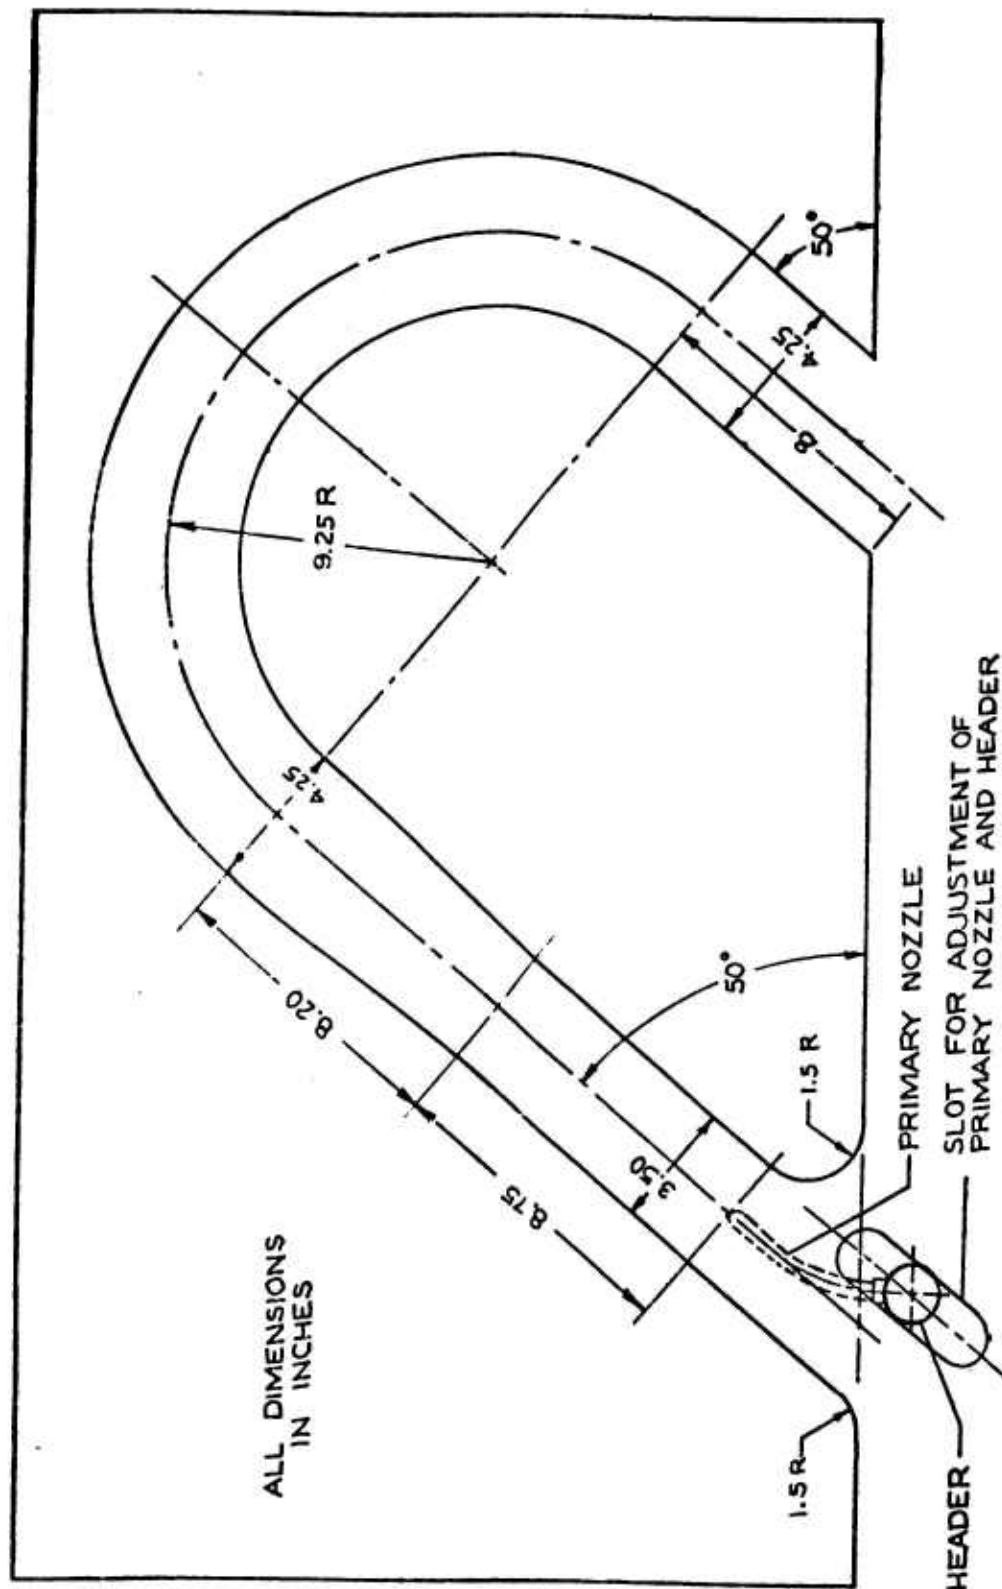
MODEL 2 RECIRCULATING EJECTOR - DIMENSIONAL DRAWING
